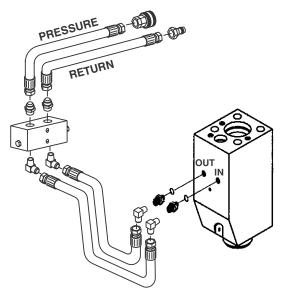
AR 48 Skid Steer. Connecting Hydraulic Lines
